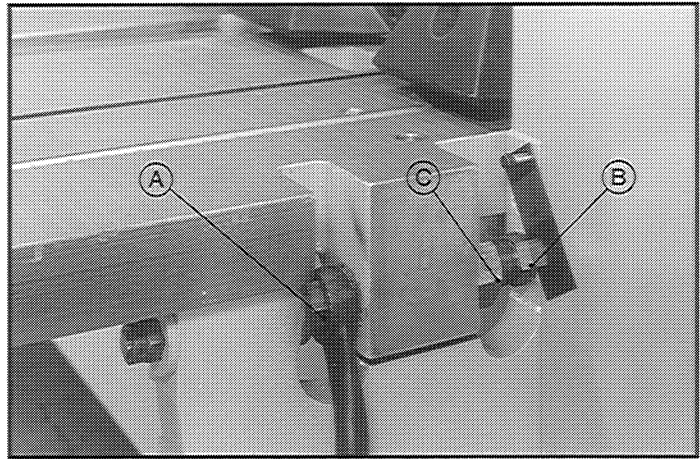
Table adjusting screws (250-750 Series)
